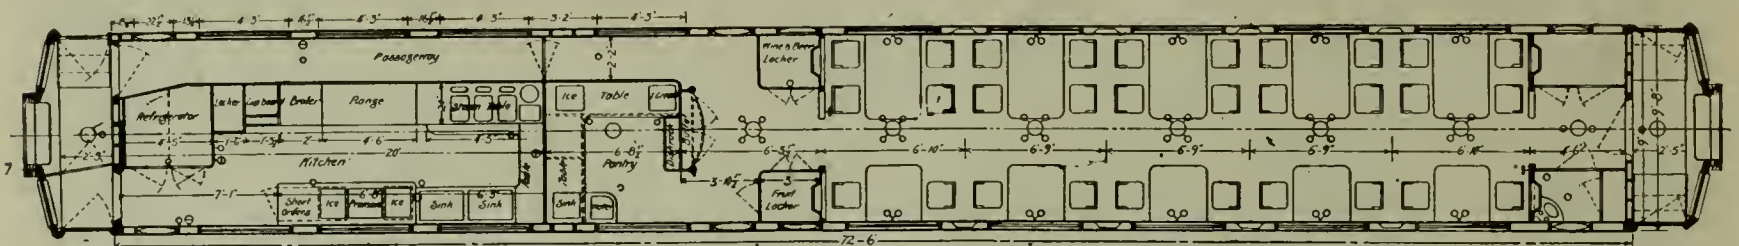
LEHIGH VALLEY DINING CARS.—FLOOR PLAN.
